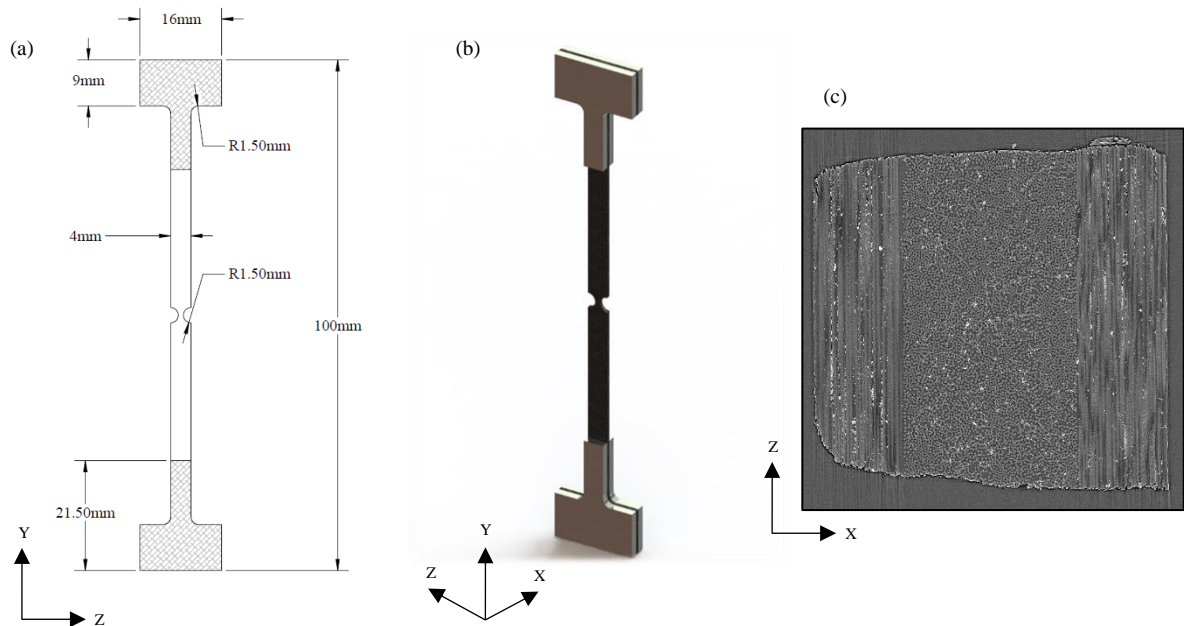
Tensile specimens: (a) key specimen dimensions, (b) tabbed assembly (CFRP plus aluminium tabs), (c) SRCT slice showing a top-view of the microstructure doped with high contrast fiducial markers. Load bearing cross-sectional area of 0° plies corresponds to $\sim 0.42 \text{ mm}^2$.
